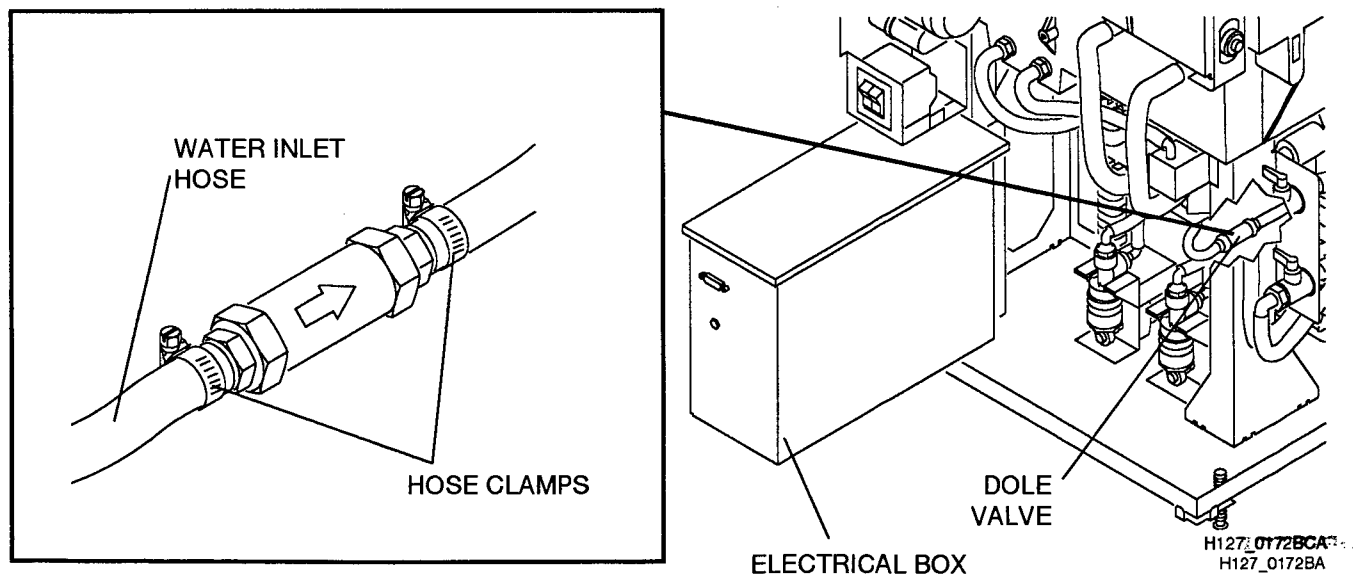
Identifying Parts on the 180 LP PROCESSOR
